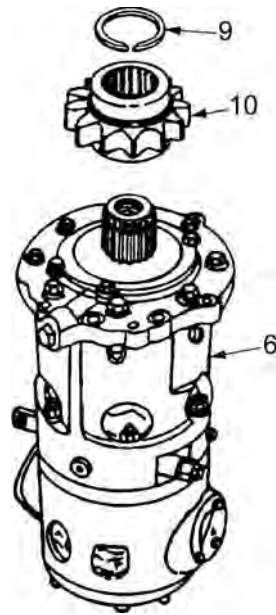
13-Tooth Hydrostatic Drive Gear Installation.
